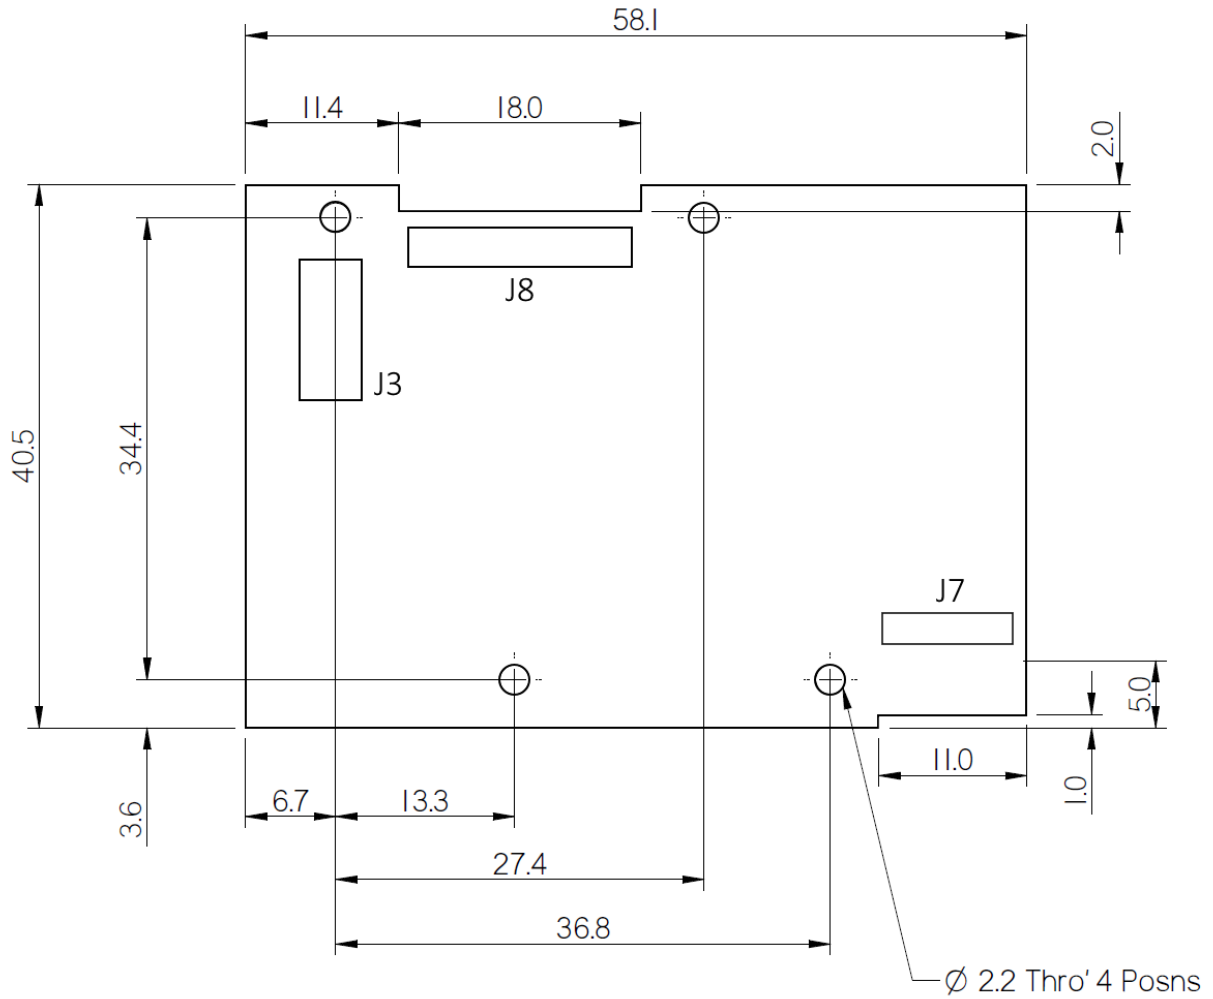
Mechanical overview of the Harrier IP Camera Interface Board; dimensions in mm. (Note – when mounted on a camera, this side usually faces away from the camera)
